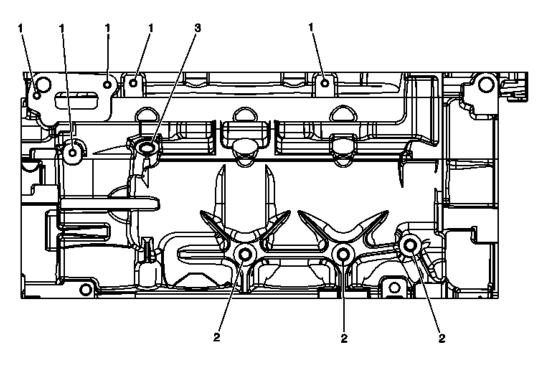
Bolts On Engine Block - Right Side View Courtesy of GENERAL MOTORS COMPANY
